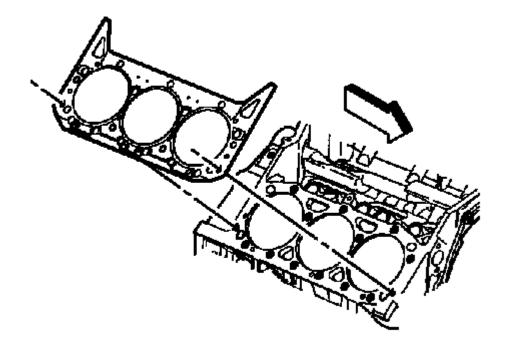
View Of Cylinder Head Gasket And Alignment Pins - Right Courtesy of GENERAL MOTORS CORP.
